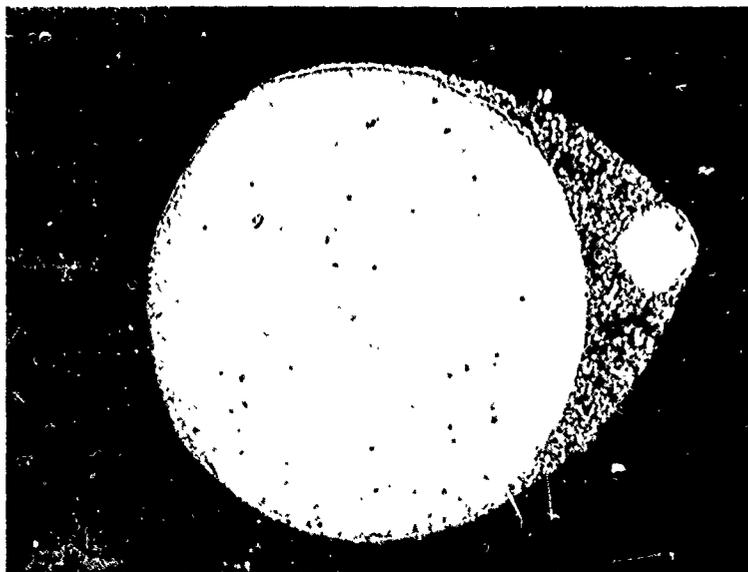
Microsection of soldered AWG 52 wire to AWG 36 wire, 500X.
